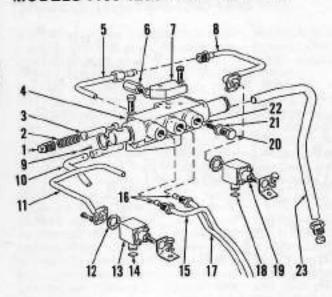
View of power shift control valve, front and rear sequence valves and related oil lines.
